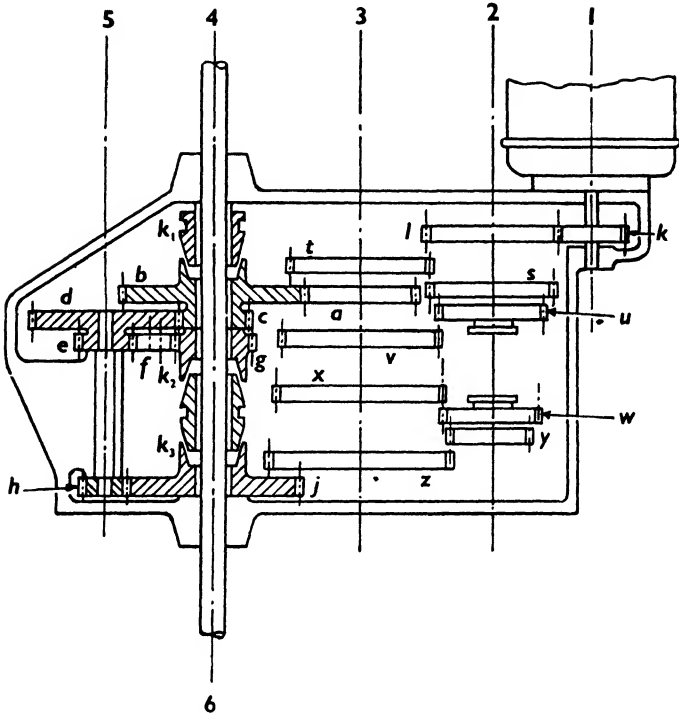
A. DRILLING MACHINE GEAR-BOX TO GIVE TWELVE SPEEDS
